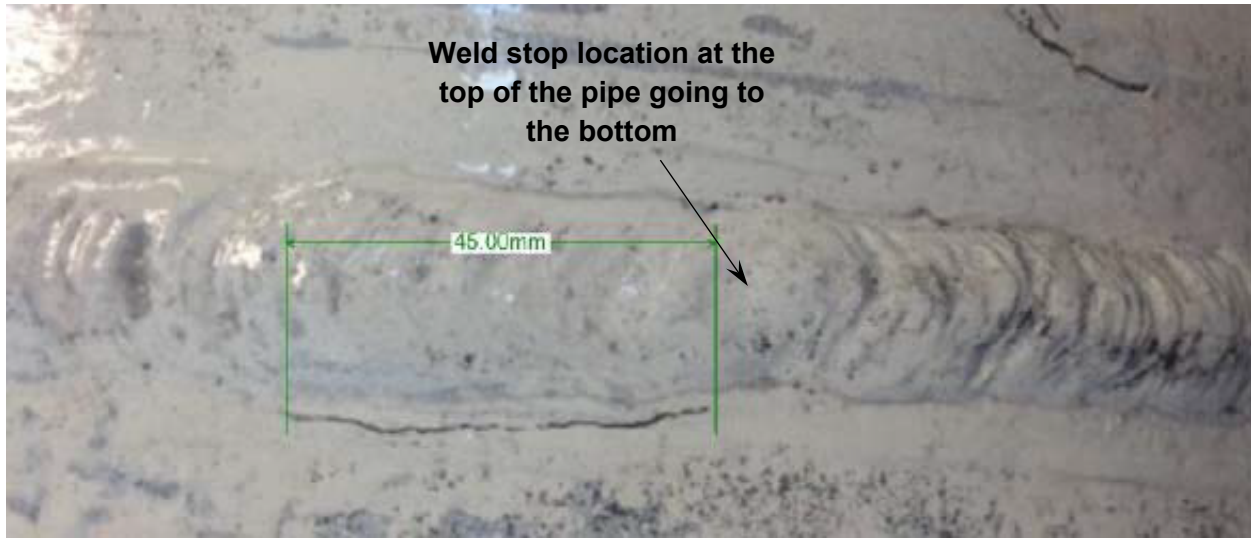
Example of a crack starting at the top of a pipe where the weld was made in the downhill welding position from the top to the bottom along both sides of the pipe (typically two welders make this weld at the same time on opposite sides of the pipe)
